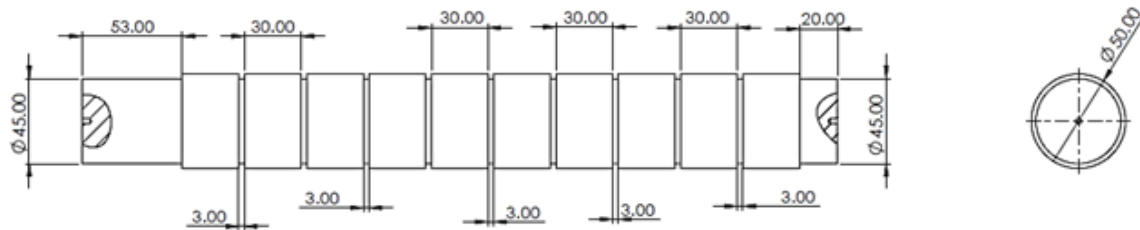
design of burnishing workpiece: a detailed representation of the workpiece configuration and features.
